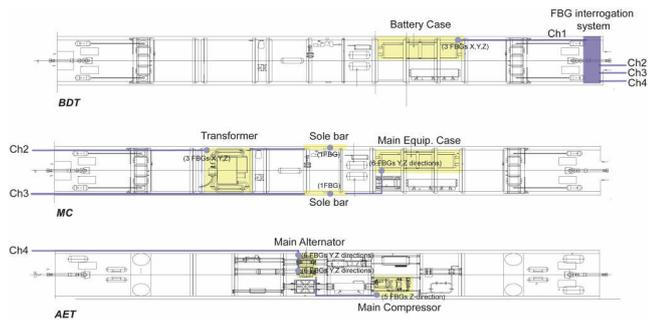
Locations of weld joints where FBG sensors are installed for monitoring dynamic strains of critical parts: BDT = Battery Trailer, MC = Motor Car, AET = Auxiliary Equipment Trailer
